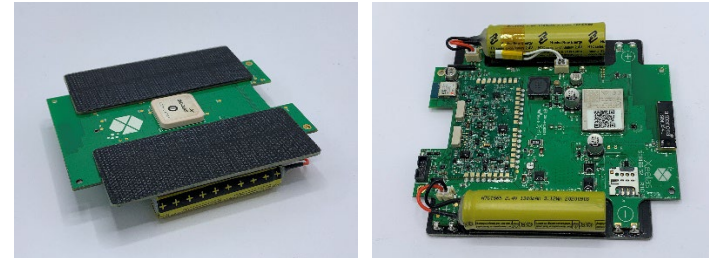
(a) Clumping of electronic components: PV panel is soldered to main PCBA and (b) Li-ion batteries are fixed using adhesive tape
